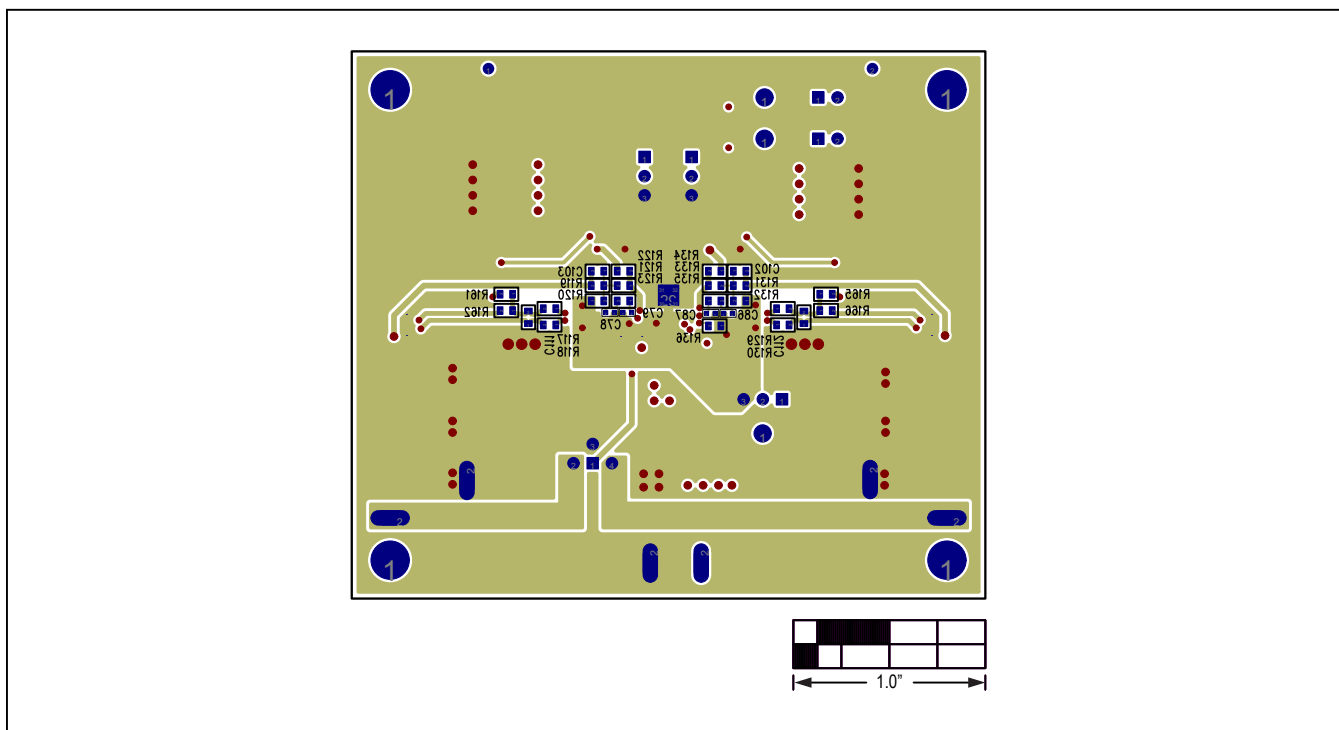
MAX16932 EV Kit PCB Layout—Layer 3
